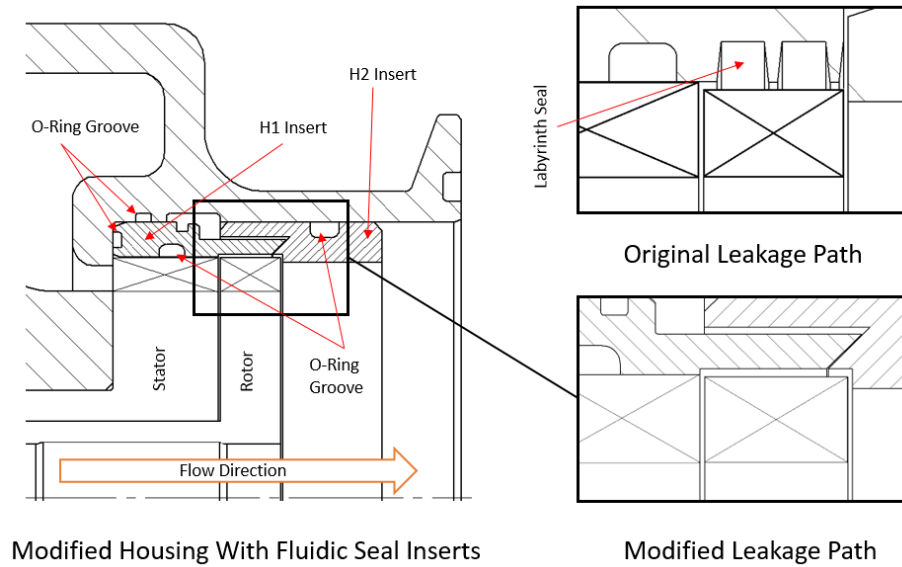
Fluidic Seal Inserts H1 and H2 in Modified Seal Assembly
